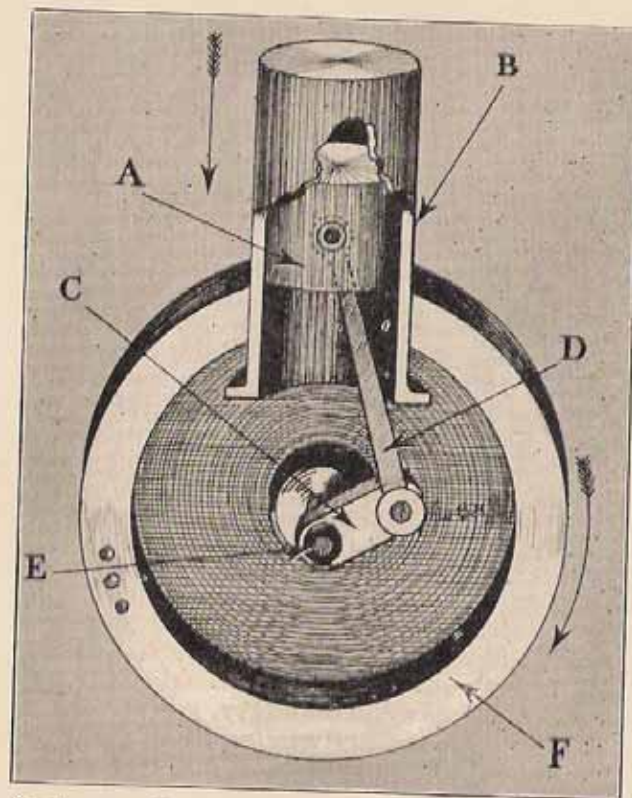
DIAGRAM ILLUSTRATING HOW A PISTON (A), SLIDING IN A CYLINDER (B), ROTATES THE FLYWHEEL (F)
